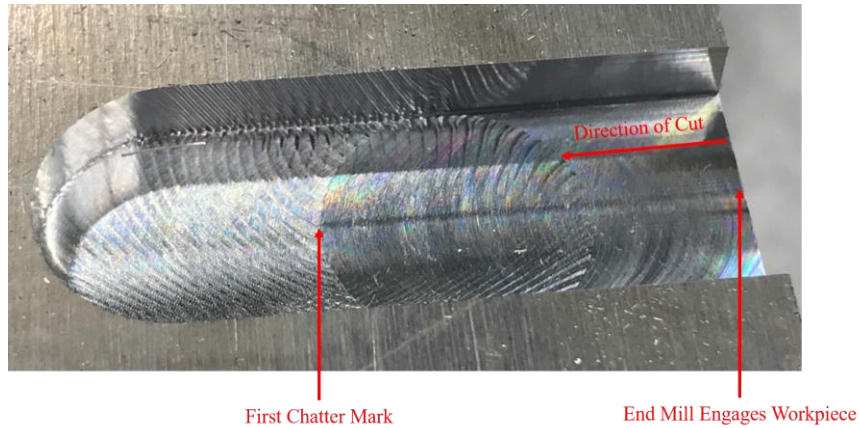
Chatter marks on a 7075-T651 Aluminum workpiece in a slot milling operation.
